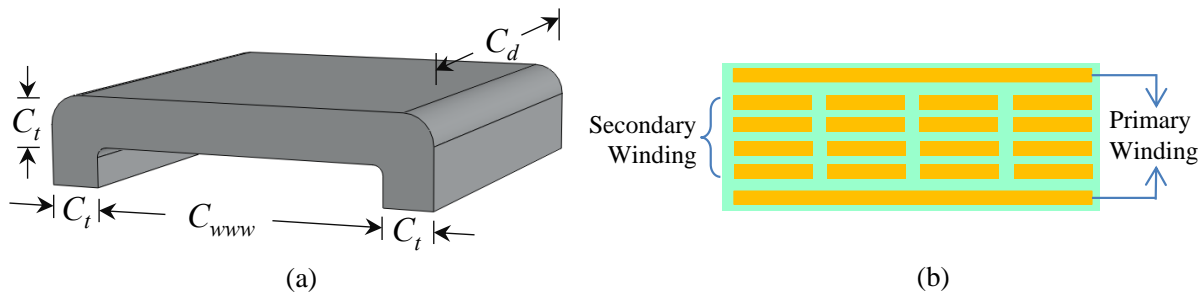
Dimensions of C-shaped nanocrystalline cores (b) cross-section view of the PCB winding configuration
